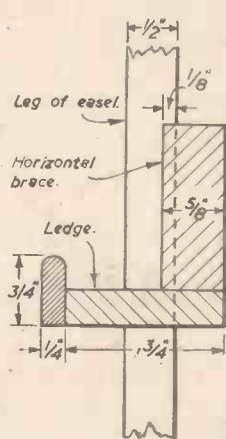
Section, showing alternative checked joint between horizontal brace and leg.
